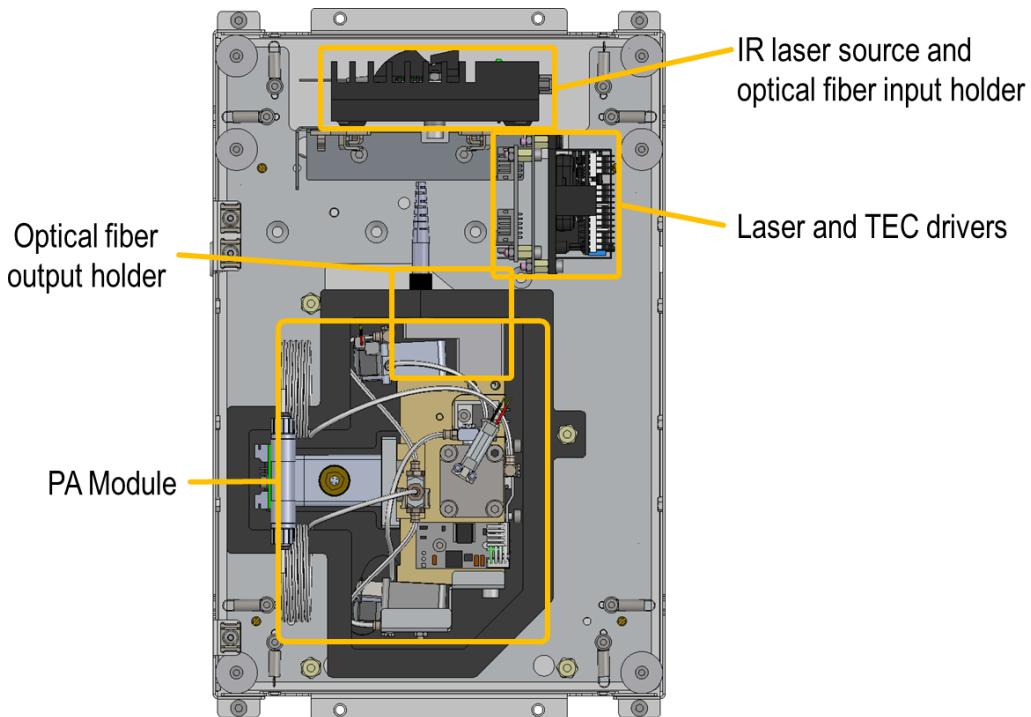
Technical layout of the Measurement Unit of the GASERA ONE product in Figure 18.
